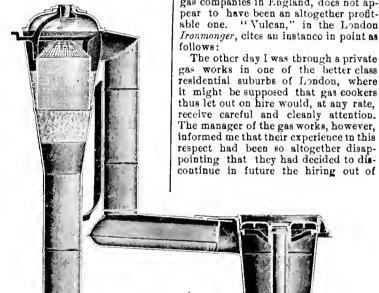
Sectional View, Showing Interior Construction of Tubes and Burner.
